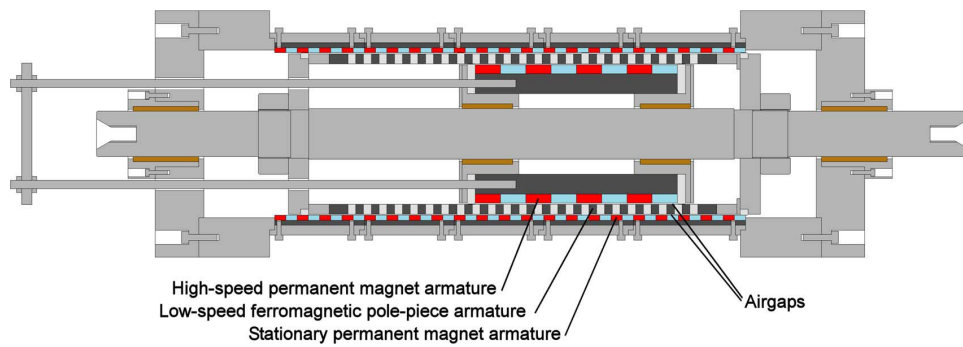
The tubular linear magnetic gear prototype cross-section presented in [77].
